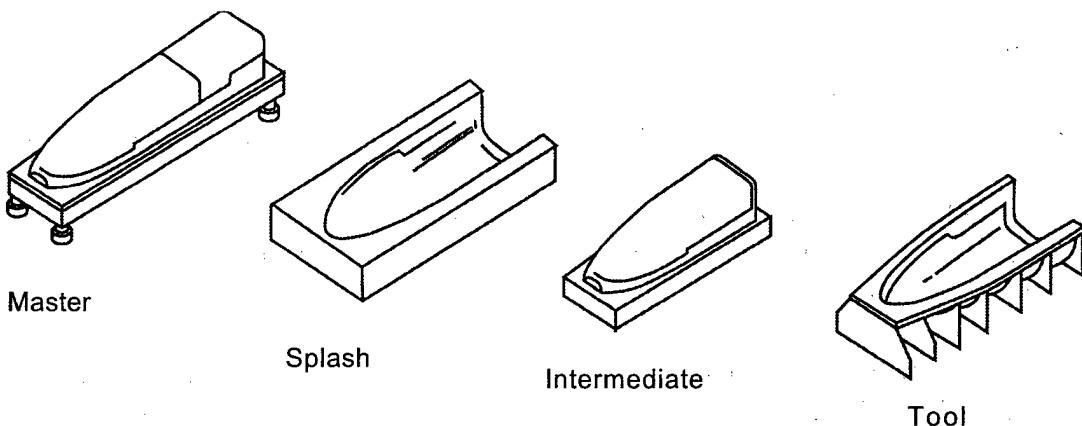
FLOW OF COMPOSITE TOOL FABRICATION
